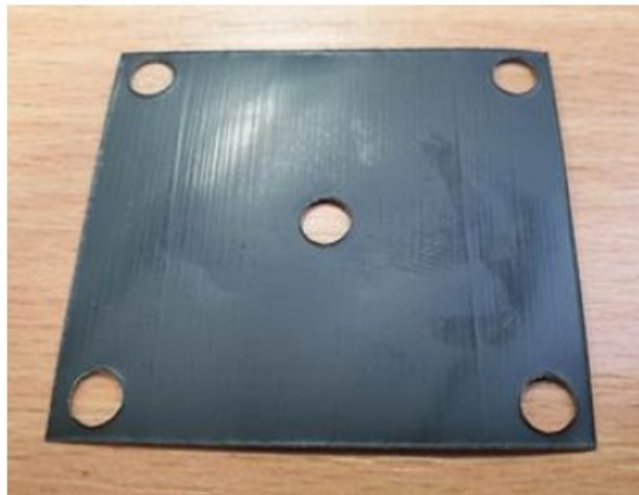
PCM Deposition on Baseless Power Module Before Assembly to the Heat Sink
